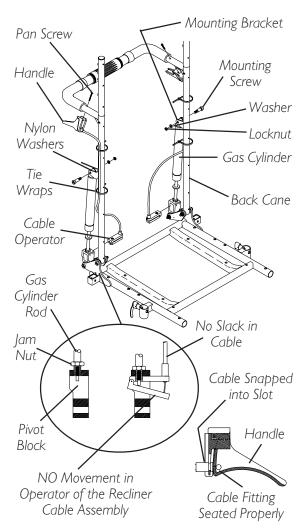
REPLACING RECLINER CABLE ASSEMBLIES
